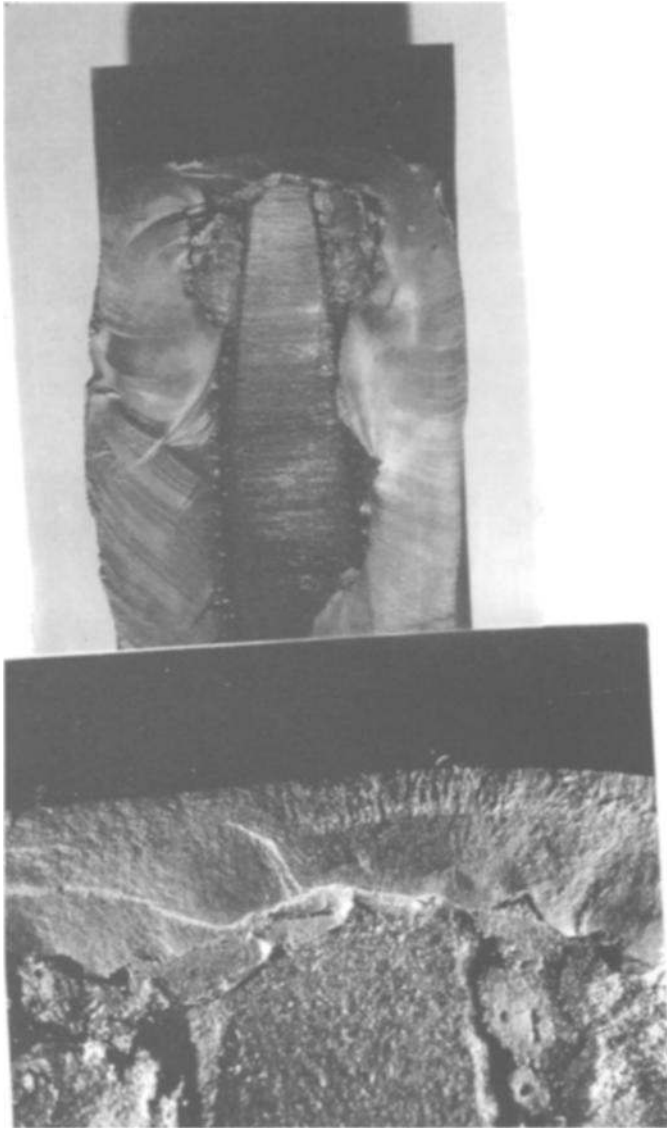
Failed crankshaft counterweight weld from a CGF crankshaft. Although the fillet weld had ample throat thickness along the sides of the counterweight, the welds were inadequate at the ends of the counterweight post where centrifugal forces in service are high. Fatigue cracking started at the weld root at the ends of the post and propagated through most of the fillet weld section before the counterweight flew off.
